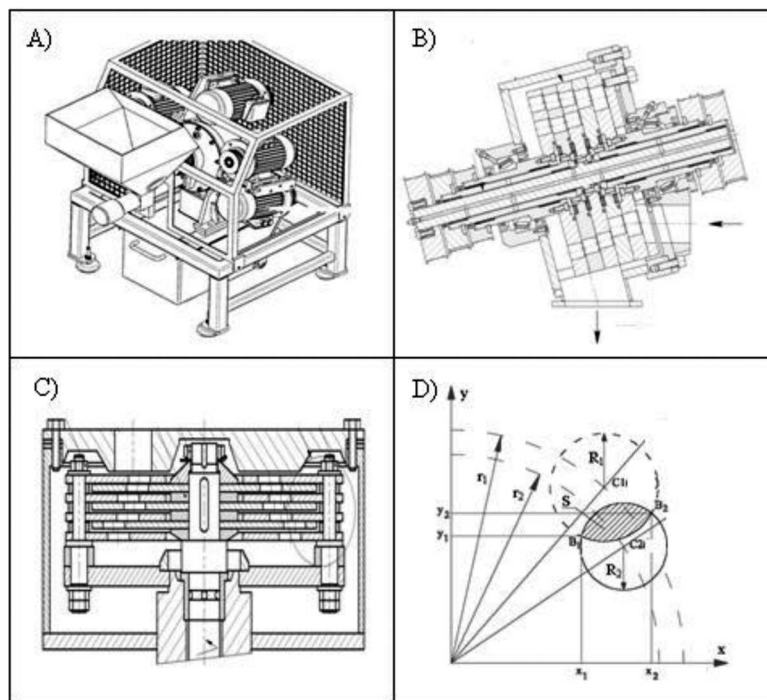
RWT-5KZ multi-disc grinder; A) general view; B) RWT-5KZ 5-disc grinder working unit; C) RWT-5T 7-disc grinder working unit; D) Common area of two holes, grinding cross-section between the edges of the adjacent grinding holes:  $C_1, C_2$  – working holes centres,  $R_1, R_2$  – working holes radii,  $r_1, r_2$  – working holes positioning radii,  $x_1, x_2, y_1, y_2$  – co-ordinates for  $B_1$  and  $B_2$  quasi-cutting pair circles intersection points,  $S_C$  – quasi-cutting hole pair common area
